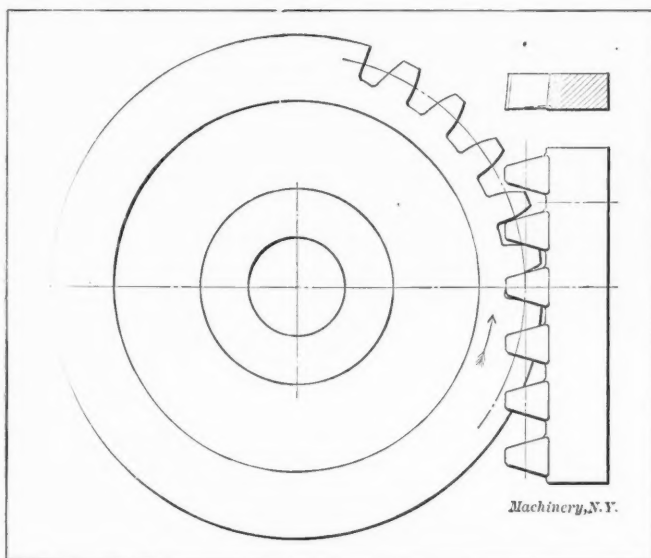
Diagram Showing Action of Rack-cutter in the Sunderland Gear-cutting Machine
